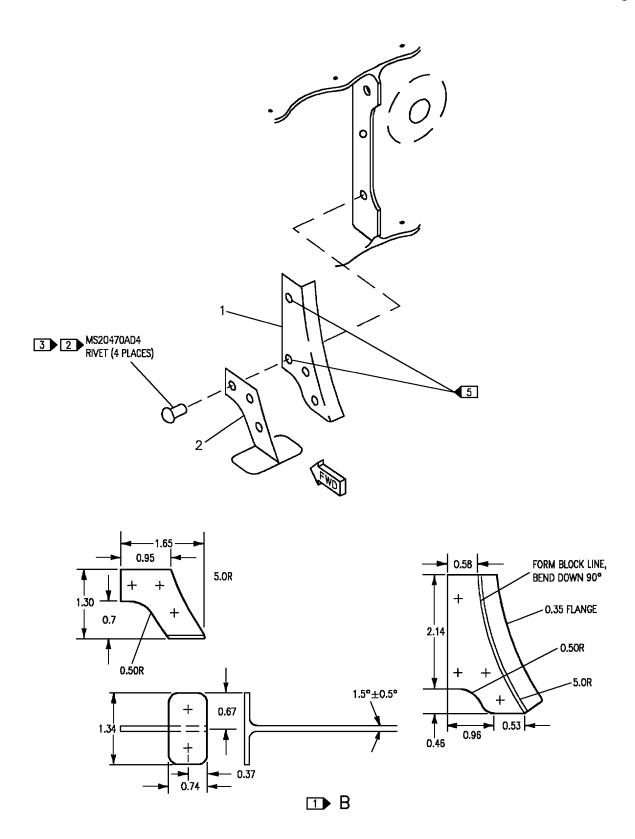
Seal, 74A190617, Repair (Sheet 2)
